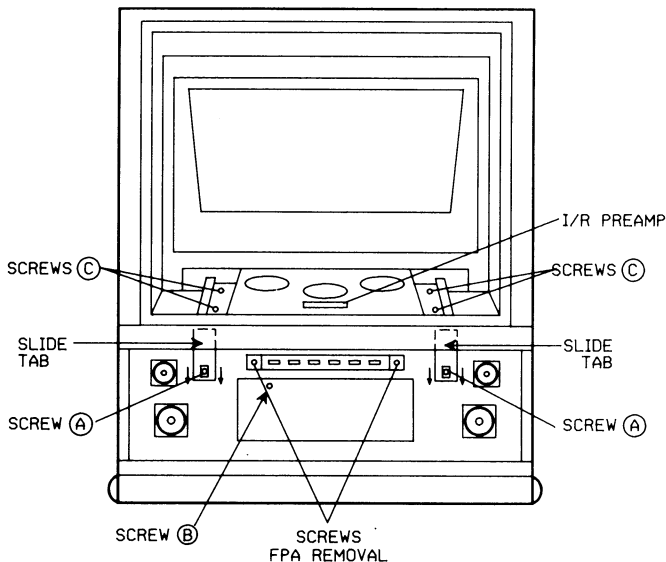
Cabinet Front View (Speaker Grille and Screen Removed) (46GW951/952, P46101/151/159, P52151)
